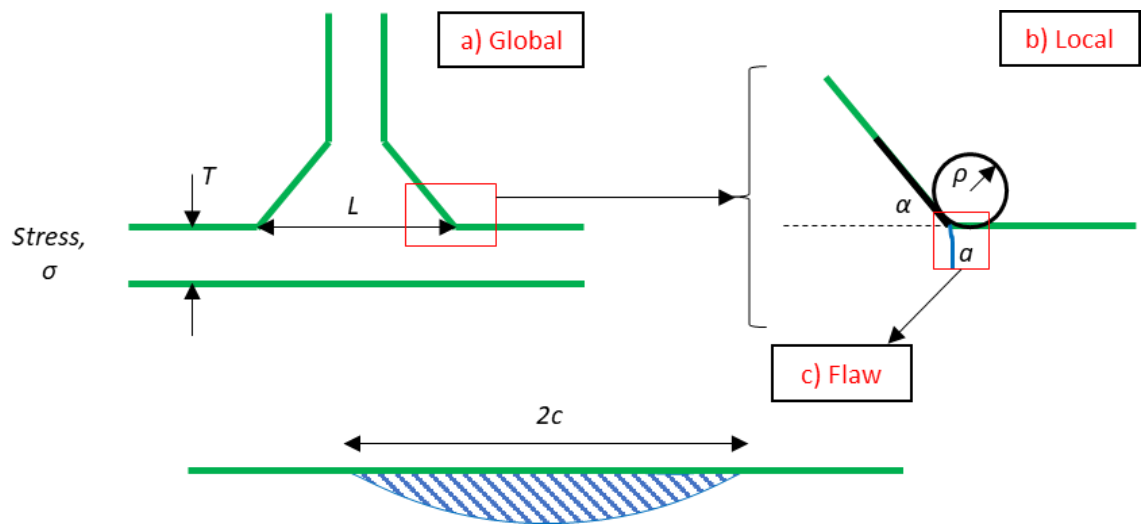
Schematic of the mathematically simplified geometry showing the features that make up the: a) Global weld toe geometry; b) Local weld toe geometry; c) Weld toe flaw geometry.
